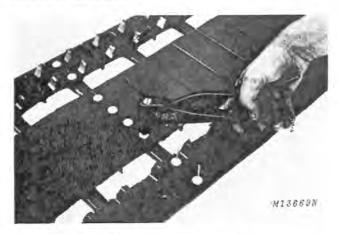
Installing Grouser Bar (Pop Rivets) (Track Removed for Illustration Purposes)
